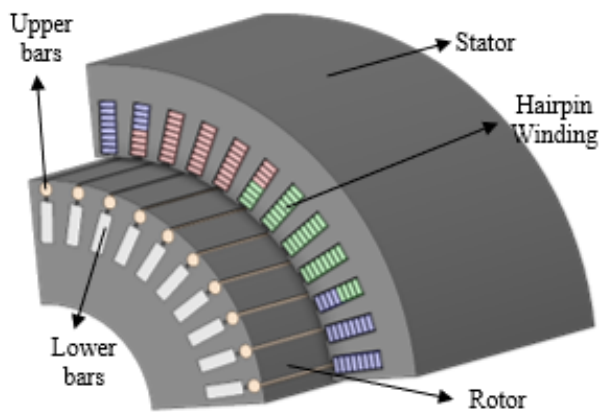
3D schematic of a double-cage induction machine, showing a cross-sectional view highlighting the rotor and stator components.
